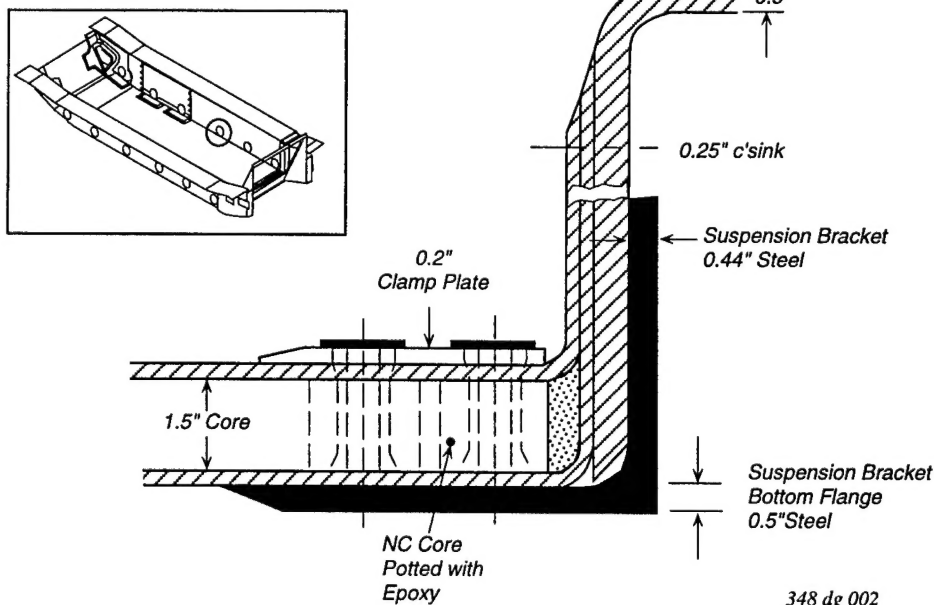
Representative sections of the Composite Armored Vehicle (CAV) Lower Hull will be fabricated using the RTM/HEEB Tool-free process during Phase II. (a) Assembly drawing. (b) Details near the roadwheels.
